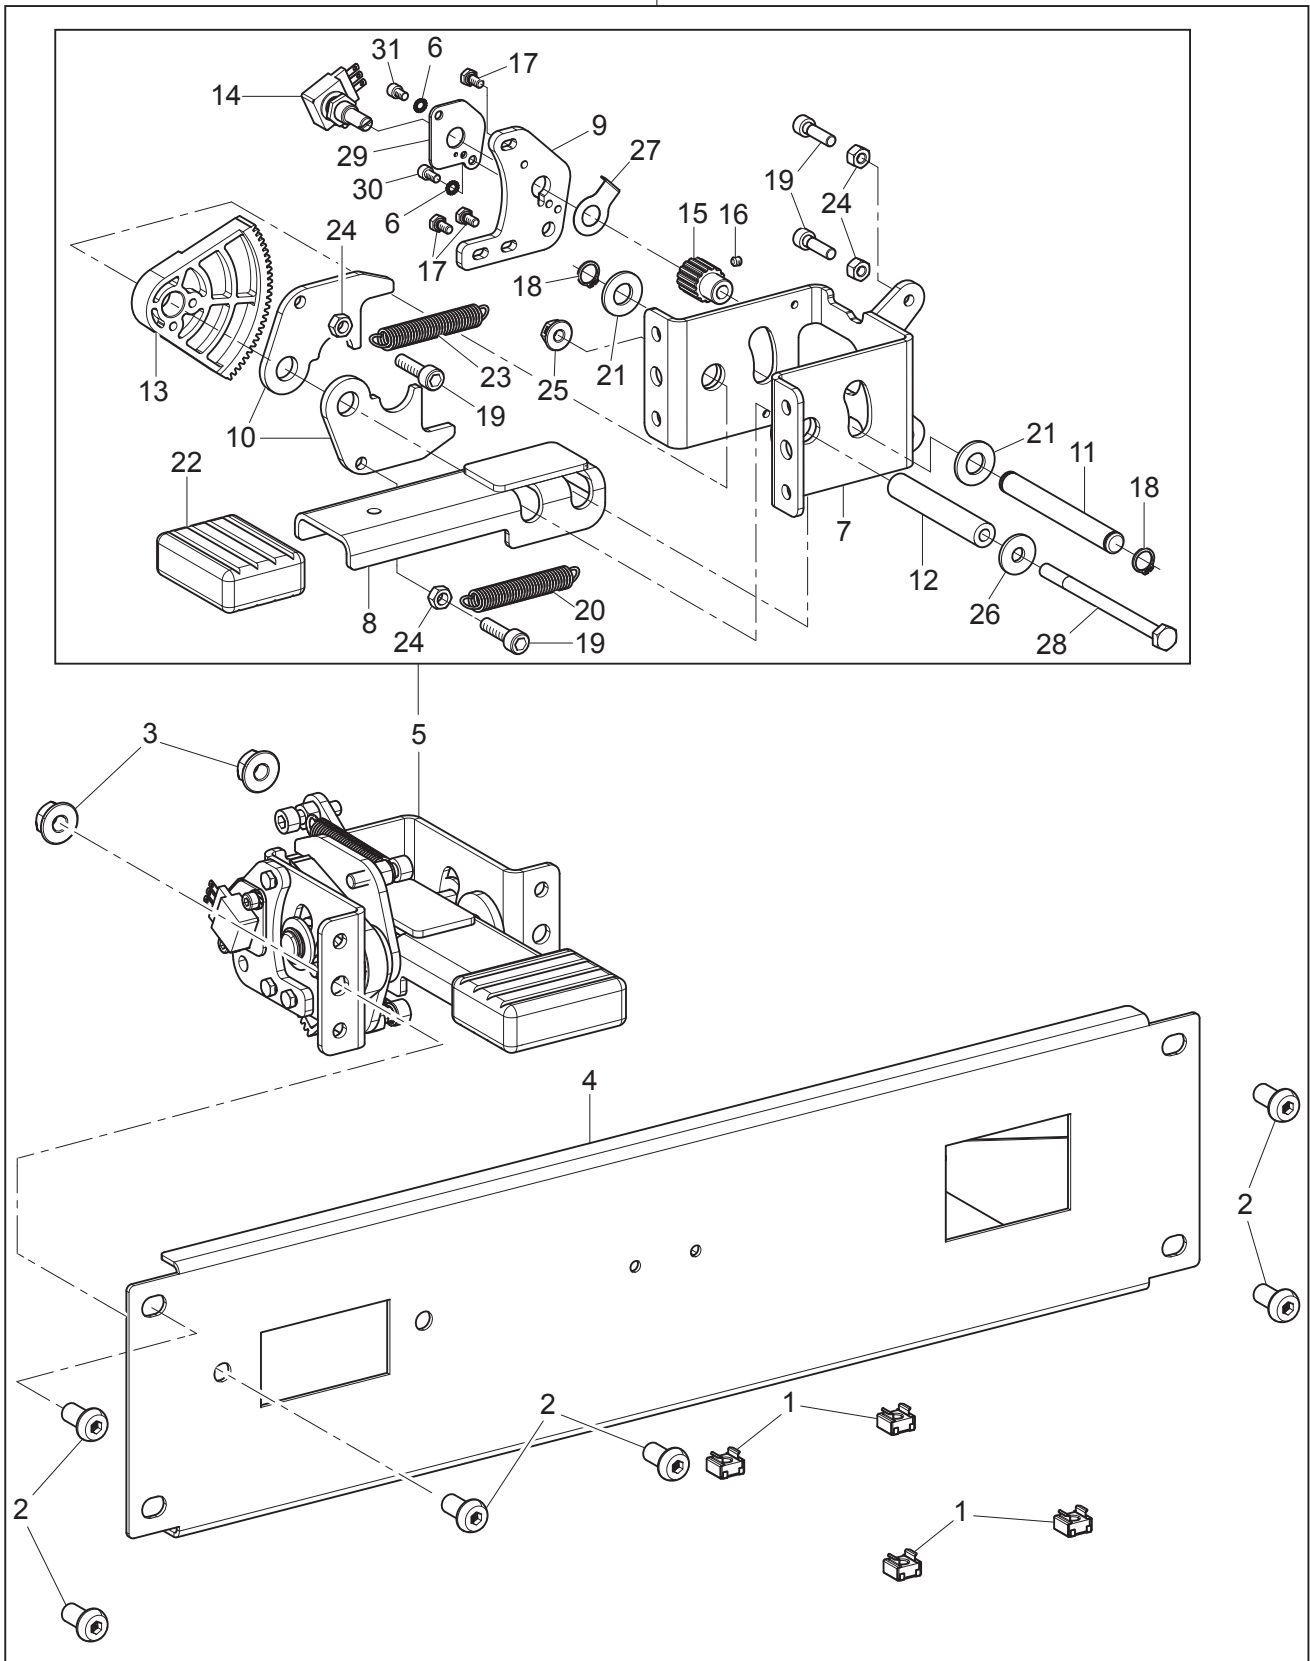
Rev. 1			VS710591253			→	←
